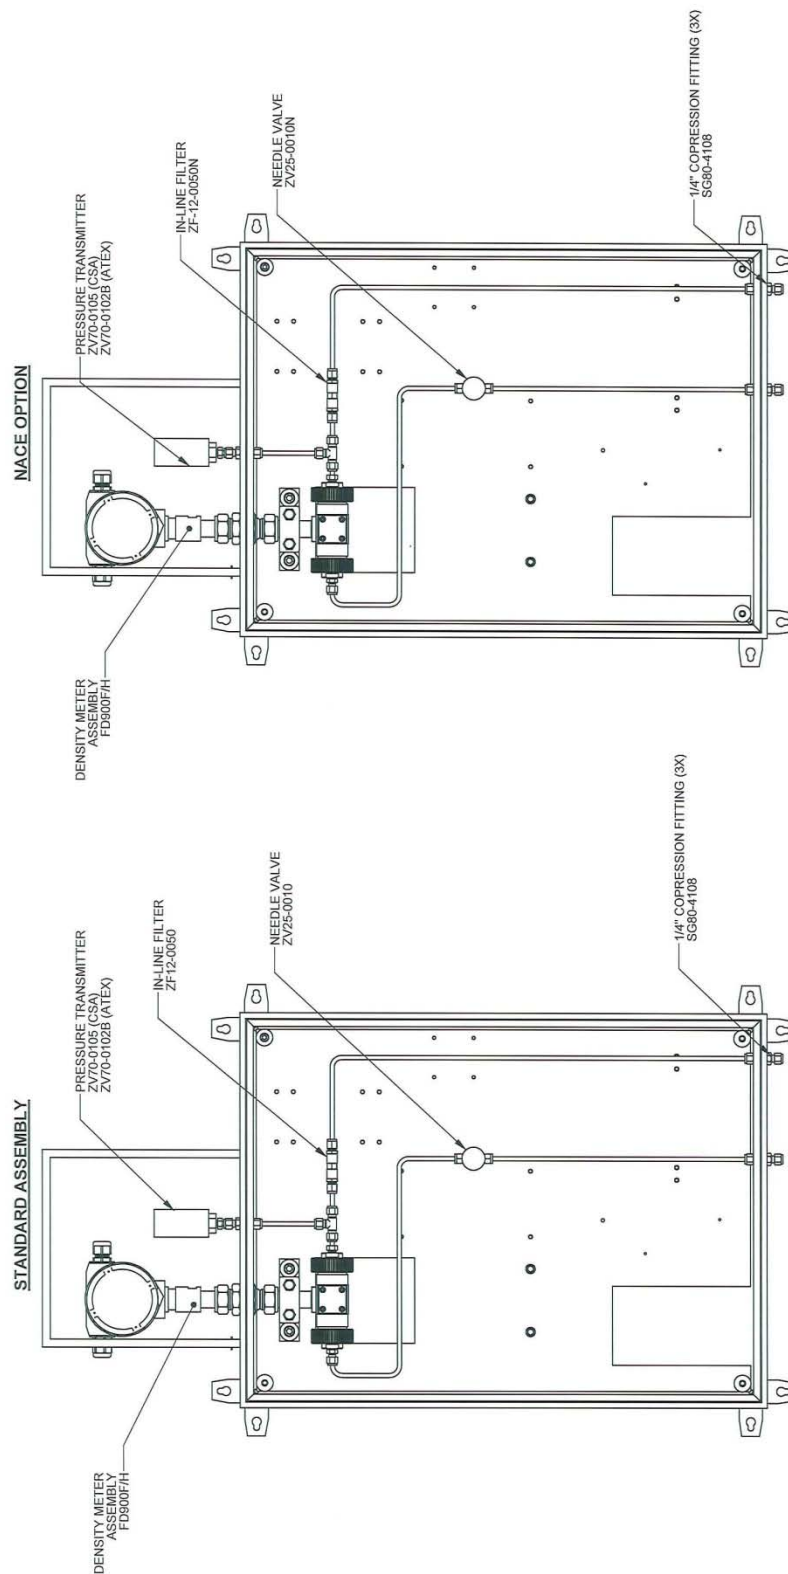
SG91-6004: General assembly drawing, HT dry gas system (sheet 2 of 3)
